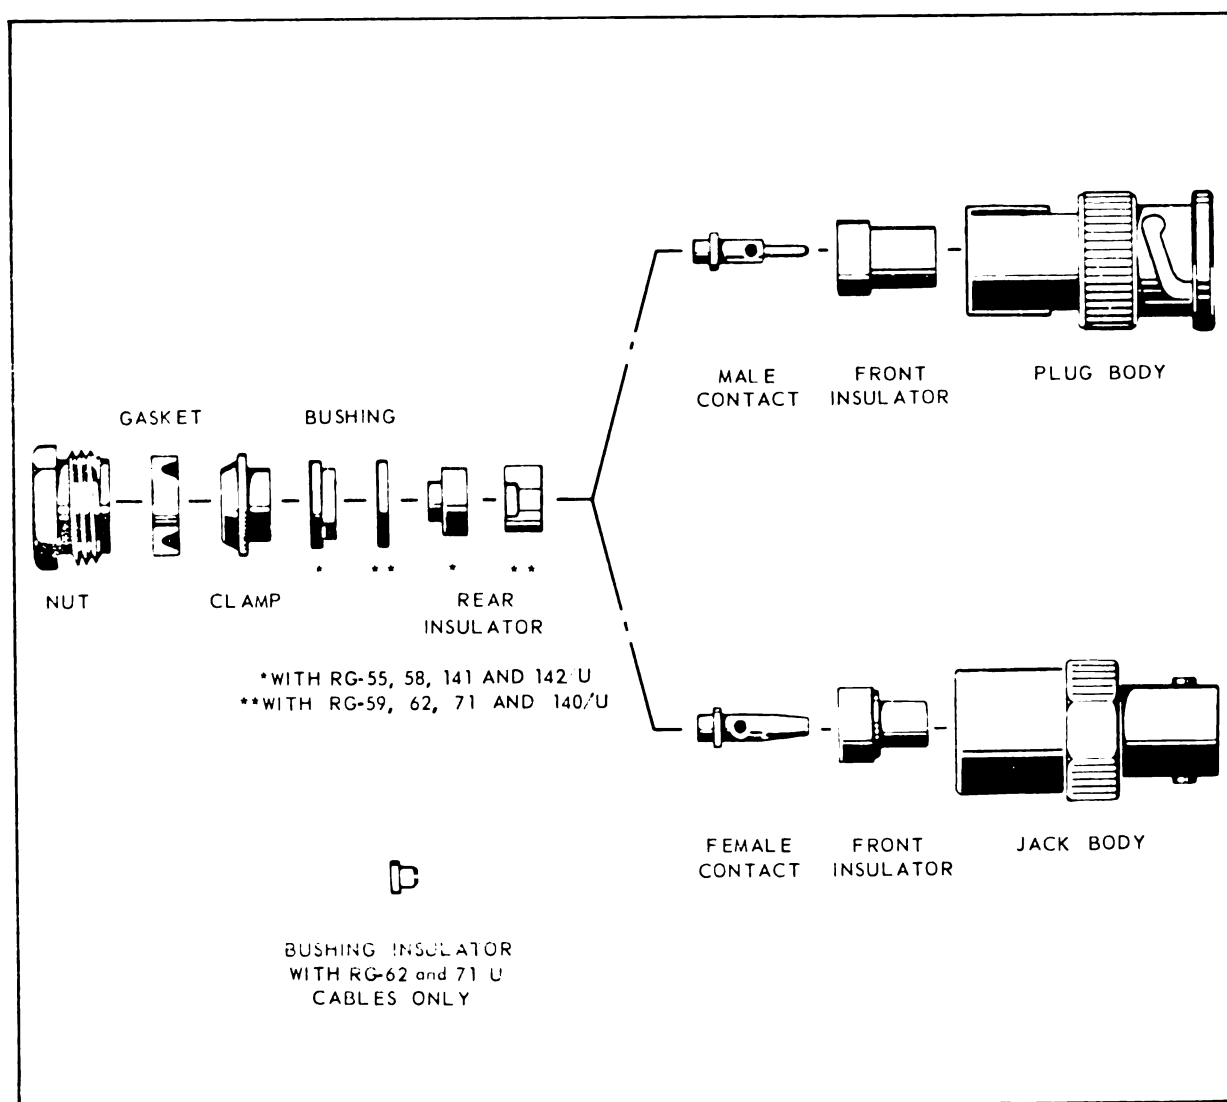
BNC Connectors with Captivated Contacts – Exploded View
